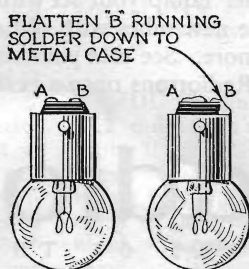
How to alter the soldering on a double contact bulb to make it single.
